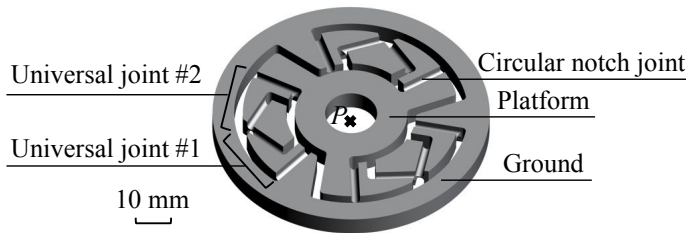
CAD view of the 3-UU flexure mechanism.
